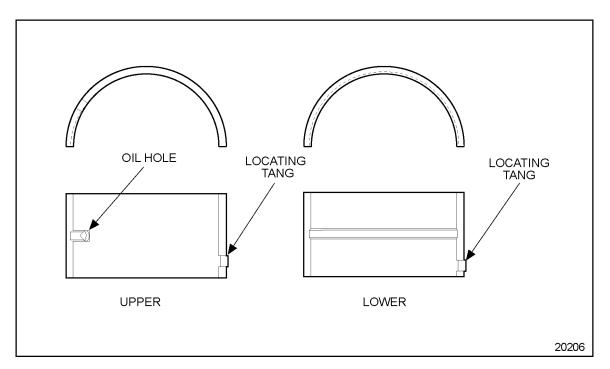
Connecting Rod Bearing Detail (Open-End Rod)
